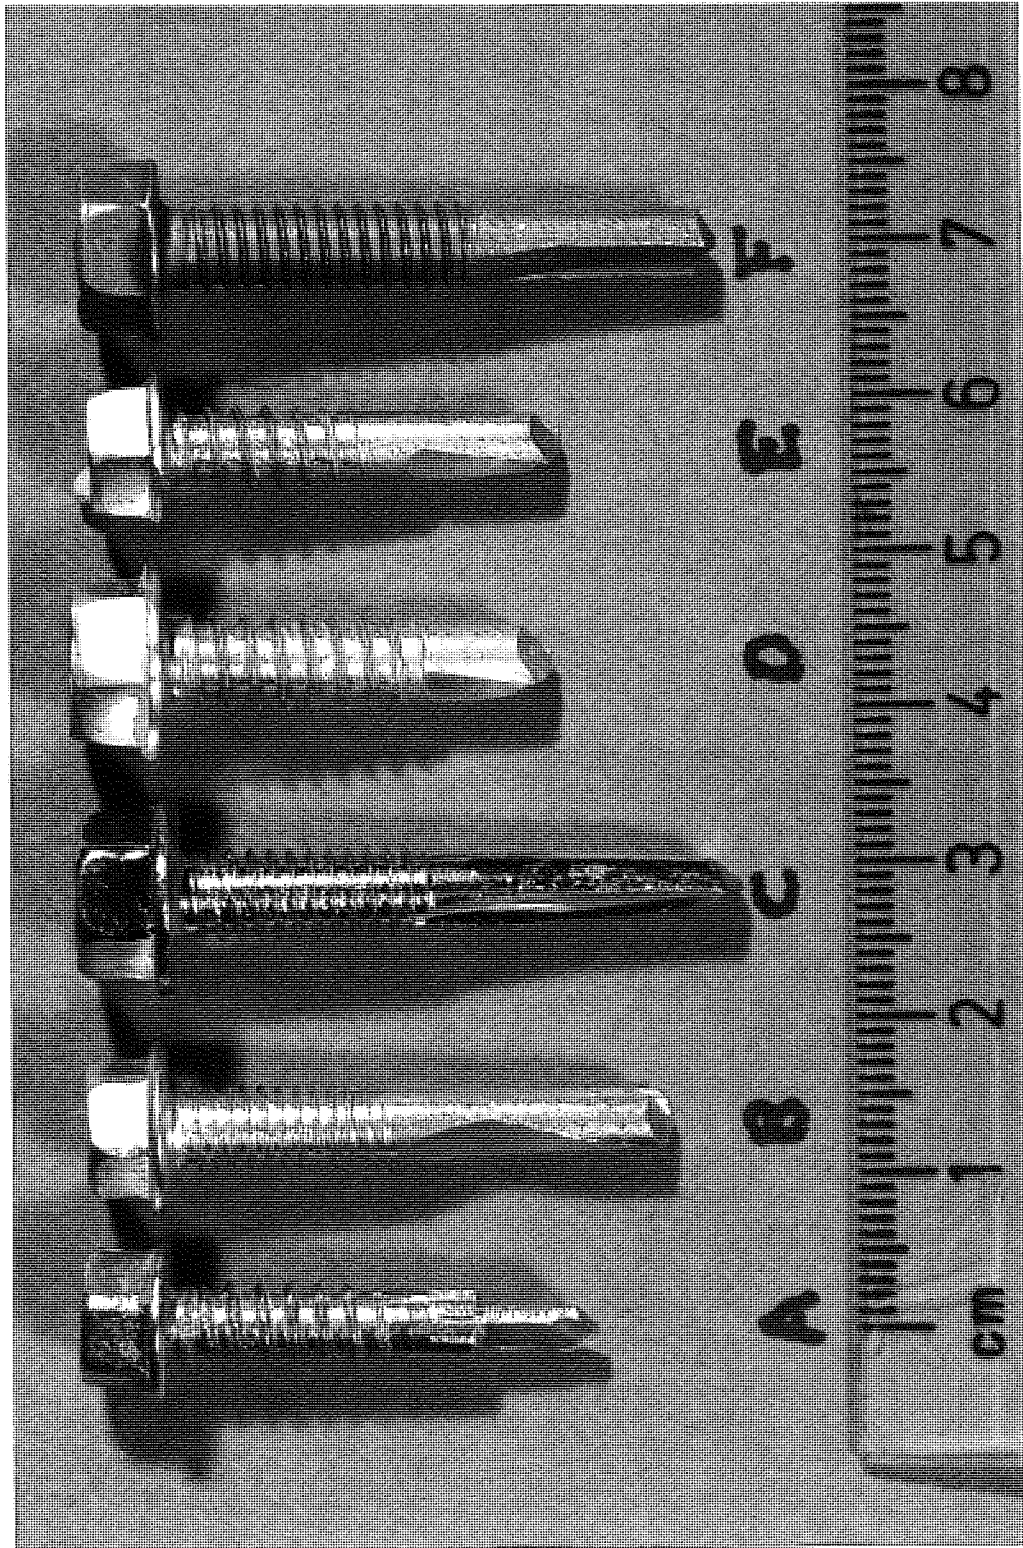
DETAILS OF DRILL SCREWS TYPES A-F
